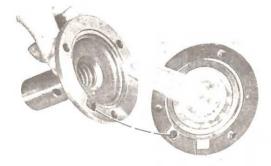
When fitting the front cover, take care that the oil hole in cover, paper gasket and gearbox case is aligned.
